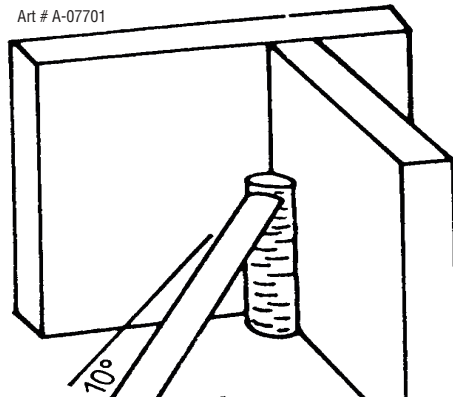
Single Run Vertical Fillet Weld
